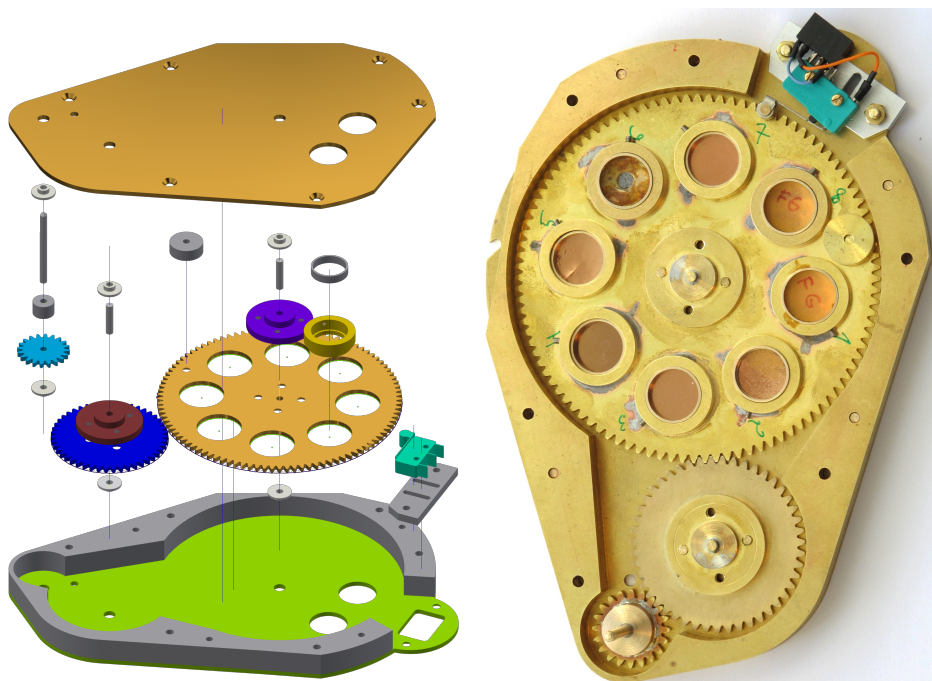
Exploded view of the filter wheel housing on the left without fasteners for clarity. Picture of the completed filter wheel housing without the top plate on the right.
